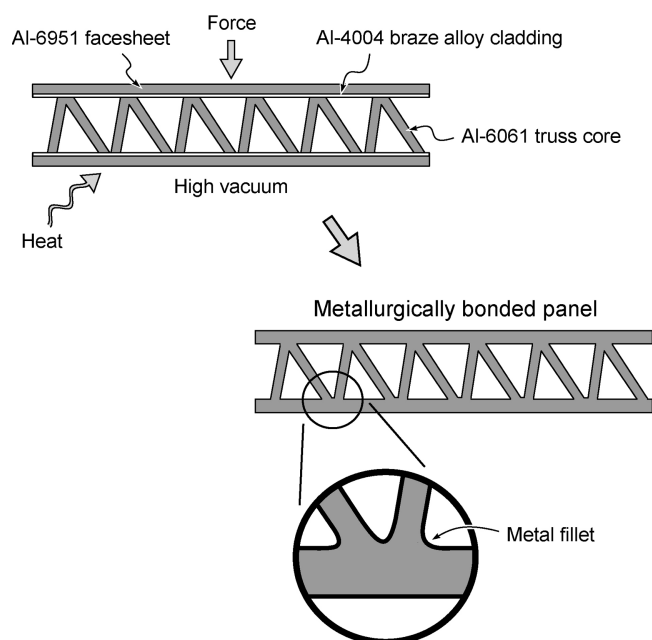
Sandwich construction technique. The aluminum alloy cores were placed between braze clad aluminum alloy facesheets and heated under argon and then high vacuum.
